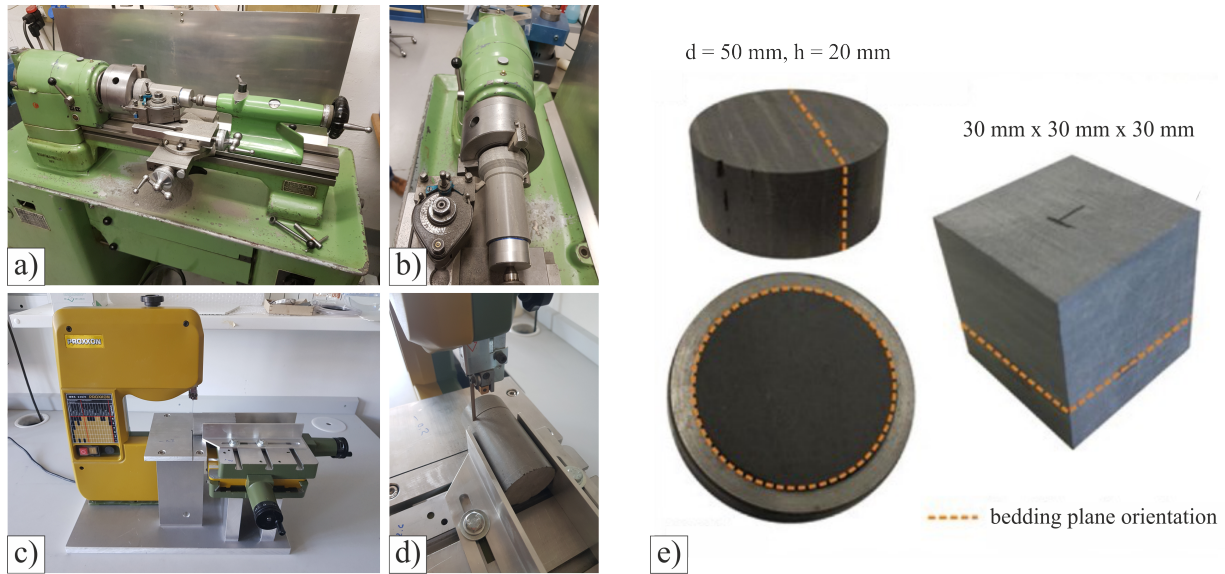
Used devices at ETH Zurich to prepare intact OPA samples: a,b) lathe to achieve the required diameter from pre-cut drill cores and c,d) diamond band saw to cut required heights. e) Final cylindrical samples, without ring and attached in the ring, and cubic samples. Modified after Ziegler et al. (2020).
